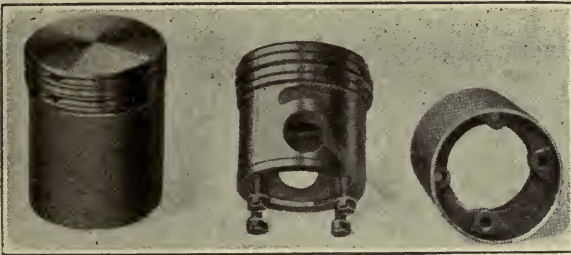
Marmon 2-Piece Piston. At left, Piston Assembled. At Center, Aluminum Head and Body. At right, Iron Skirt.
